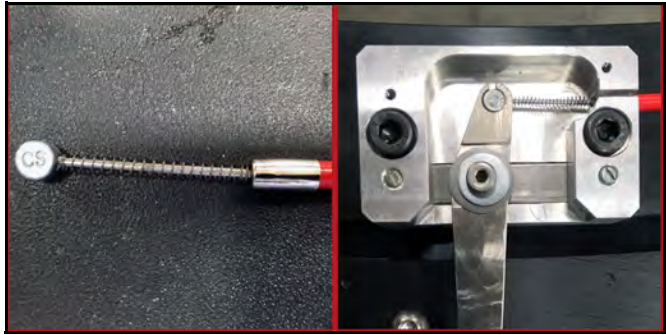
BARREL END OF CABLE WITH SPRING, FERRULE INSTALLED ON CABLE HOUSING (LEFT); CABLE INSTALLED IN ACTUATOR HOUSING (RIGHT)
